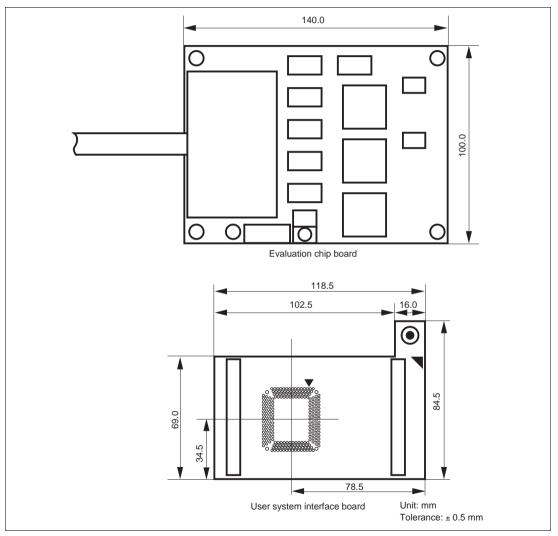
Dimensions for Evaluation Chip Board and User System Interface Board
